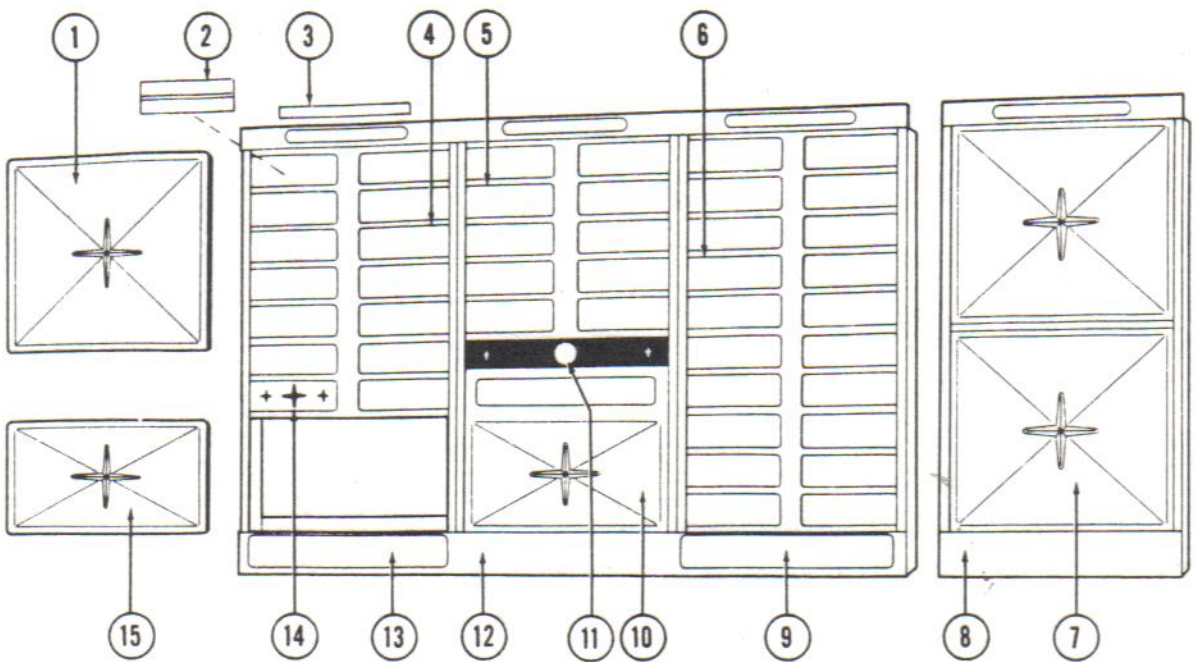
PROGRAM HOLDER AND FRAME ASSEMBLY
